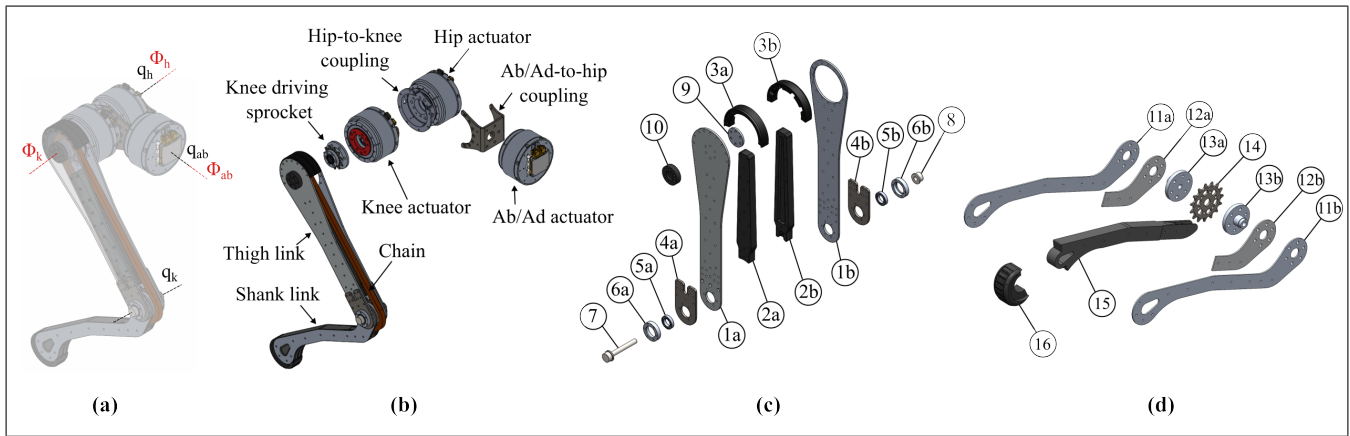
(a) Joints and Actuator Axes; (b) Details of Leg Design; (c) Details of Thigh Link: ①a, ①b: Al Sheets; ②a, ②b: Central spacers; ③a, ③b: Upper spacers; ④a, ④b: Thigh strength plates; ⑤a, ⑤b: Knee bearings; ⑥a, ⑥b: Knee bearing blocks; ⑦: Knee bolt; ⑧: Knee nut; ⑨: Sprocket support shaft; ⑩: Support shaft fastener; (d) Details of Shank Link: ①a, ①b: Shank Al-sheets; ②a, ②b: Shank strength plates; ③a, ③b: Knee sprocket couplings; ④: Knee driven sprocket; ⑤: Shank spacer; ⑥: Foot.
